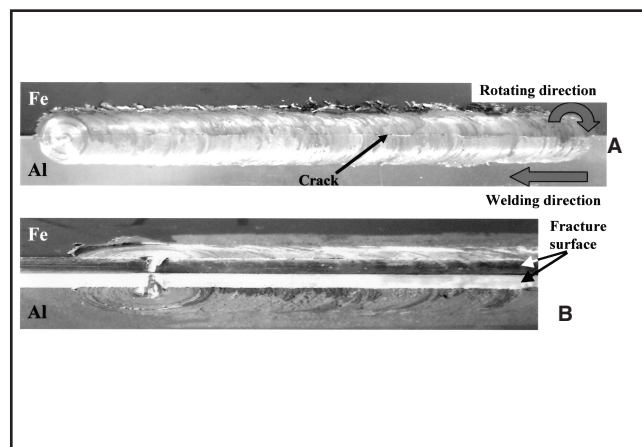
Surface view and fracture surface of the weld when welding direction was reversed, that is, the pin rotation direction was counterclockwise.
